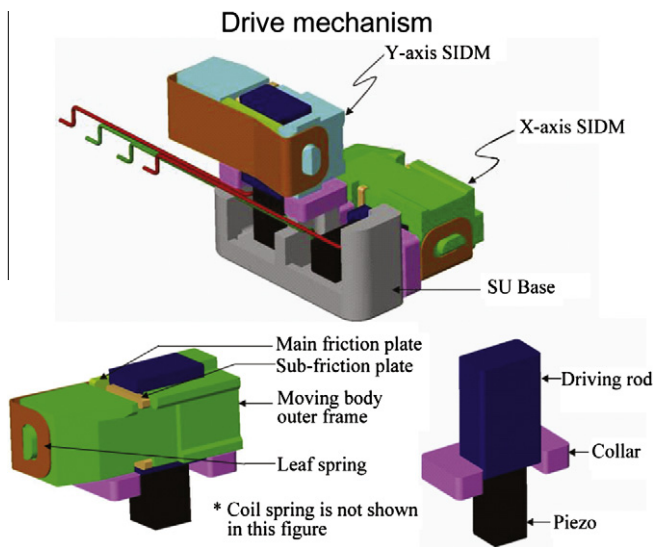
Schematic showing detailed construction of the drive mechanism (SIDM assembly) [2,3,29].
